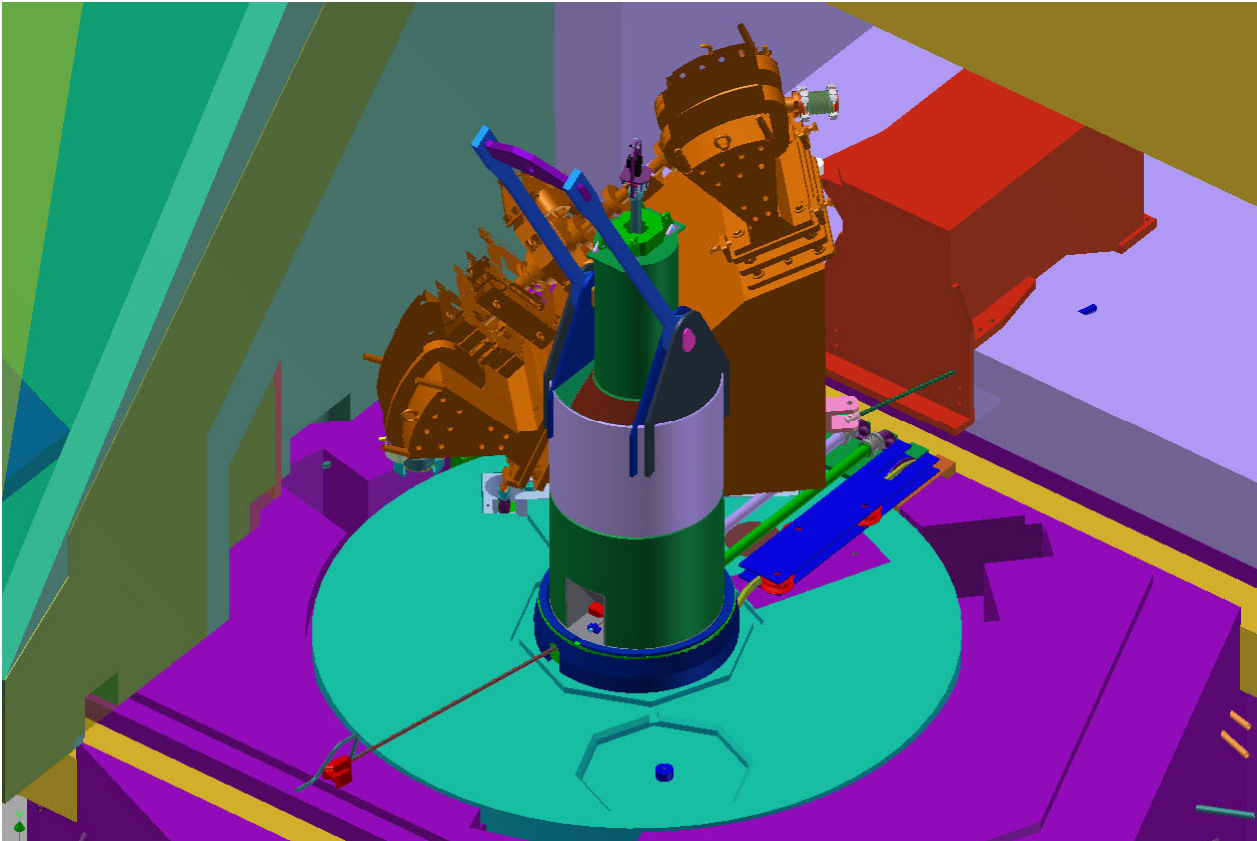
The target cask shown on the top of the subcritical Assembly during the loading of used target assembly.
